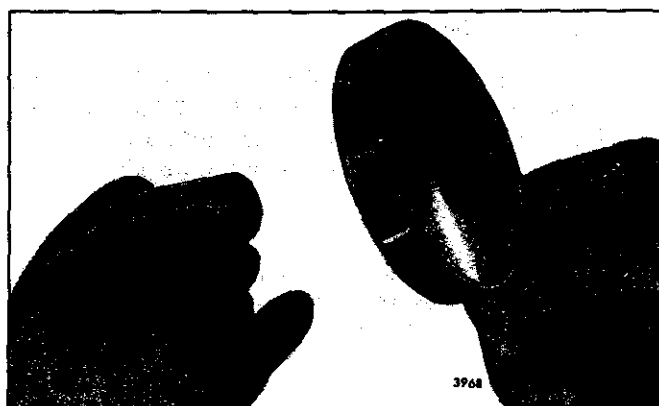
Examining Sealing Surface with a Magnifying Glass
